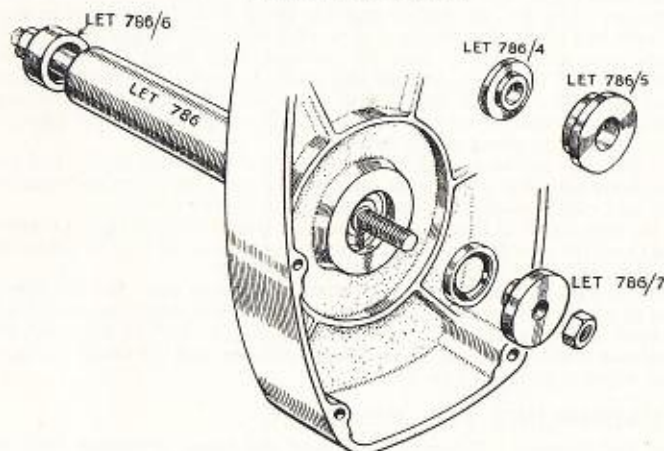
Service Tool No. LET 786. For fitting oil seals.
